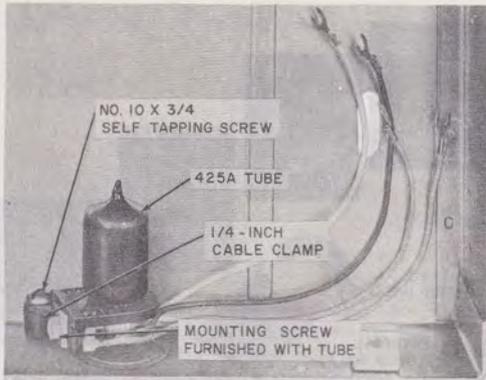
Installation of Cold-Cathode Tube in 113-type Apparatus Box
